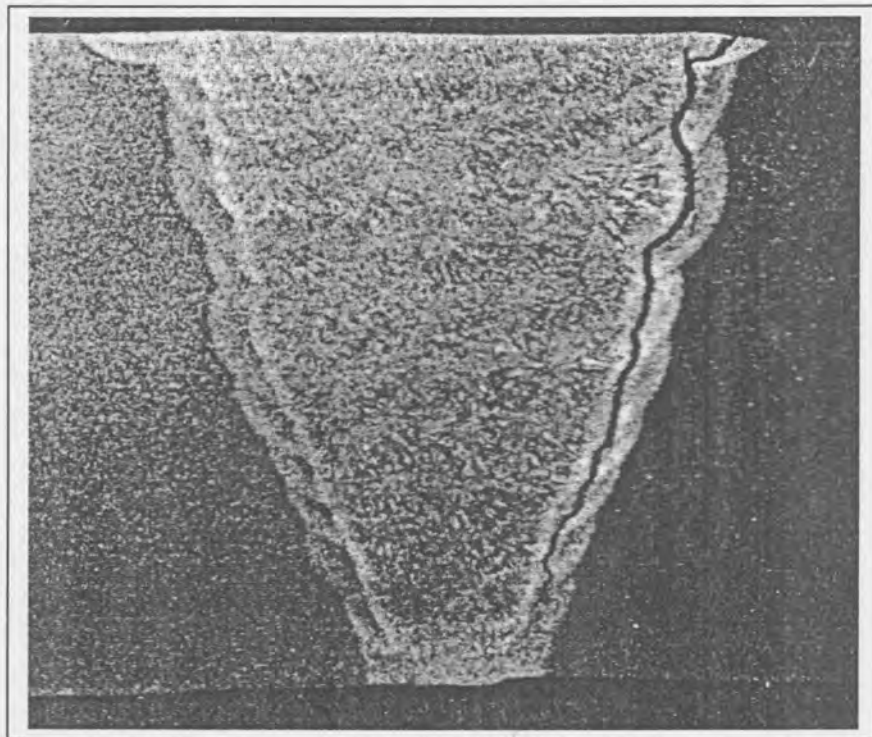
Reheat crack in Cr-Mo-V butt weld. After Branah, G.D., High temperature mechanical properties as design parameters.
